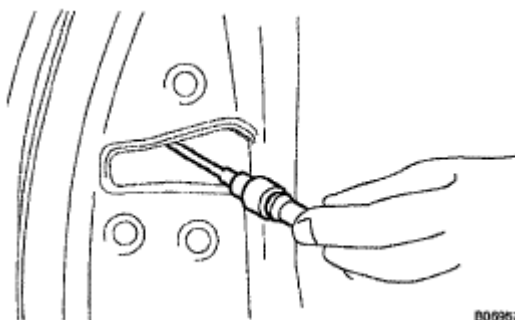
Installing Rear Door Outside Handle Cover Screw
